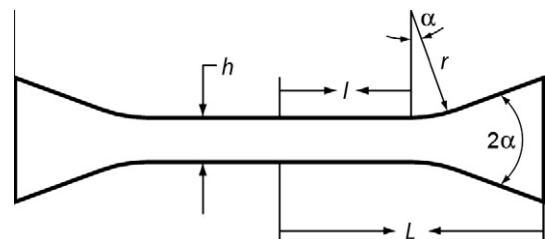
Geometry of a BFCM specimen in a plane perpendicular to the thickness dimension t .
